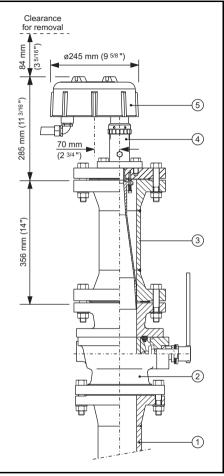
Dimensions of SmartRadar installed on top of 4" ball valve
